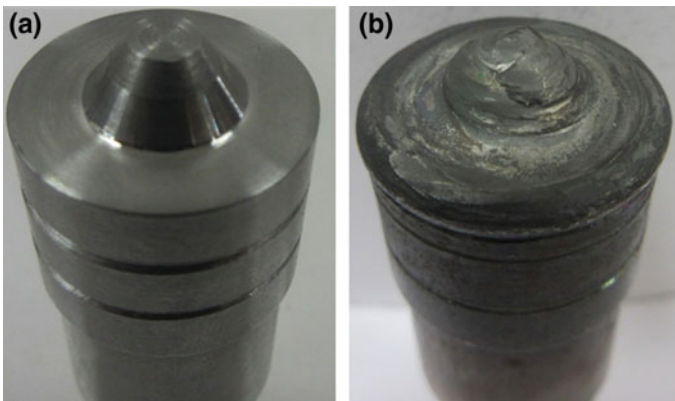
Tool images a unused tool b used tool after removal of sticking copper alloy
